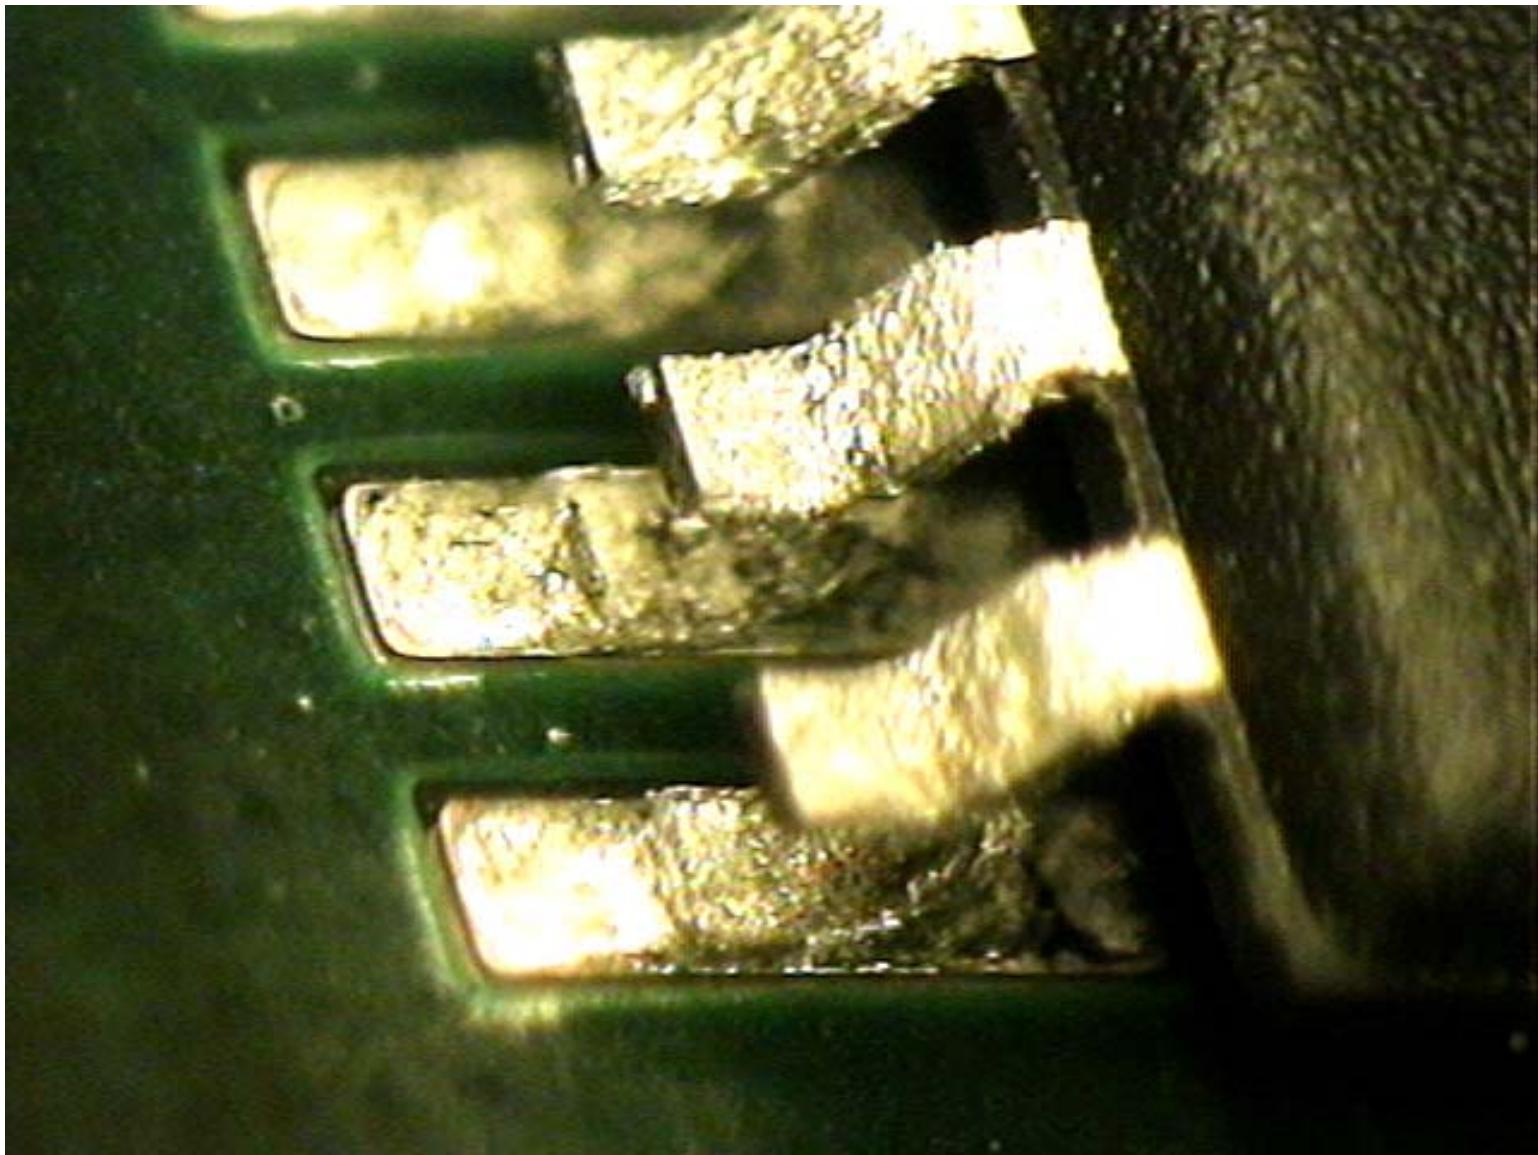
Vehicle ID 119, TSOP U16, SACB Solder/SnPb Component Finish, 100x
